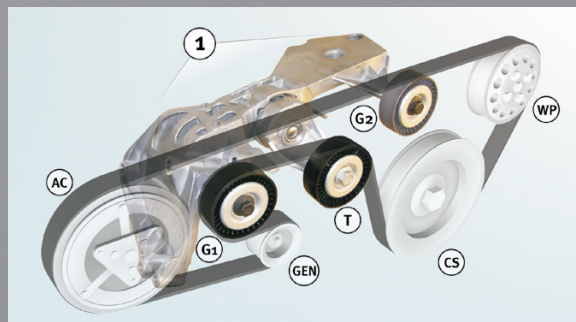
55165 – Carrier with tensioner in the accessory drive diagram
